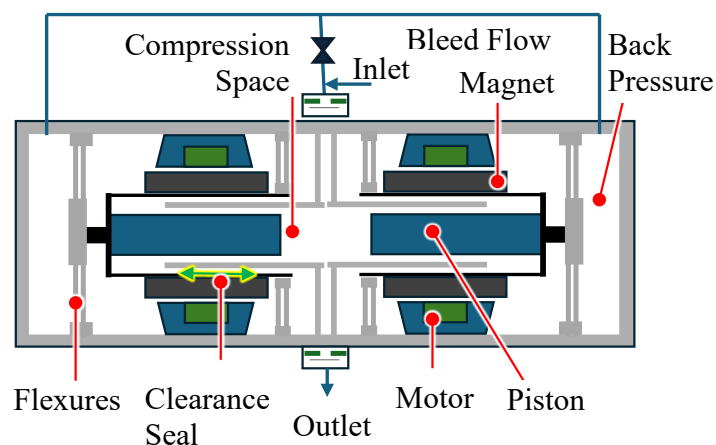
Schematic of existing linear valved compressor with external bleed valve
